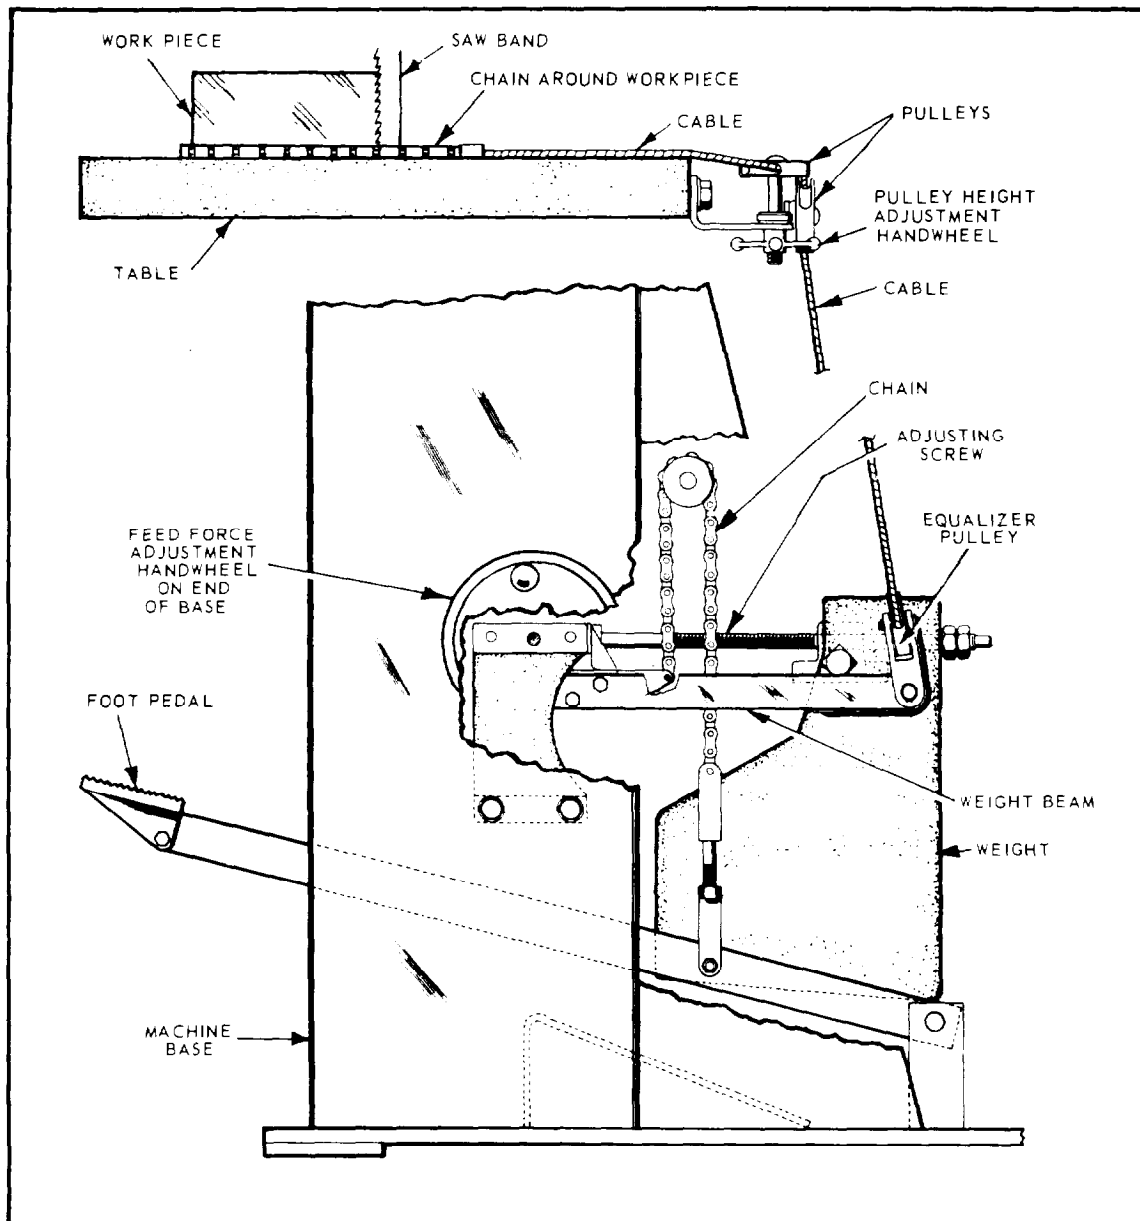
Side view of the Weight-type Power Feed assembly.
